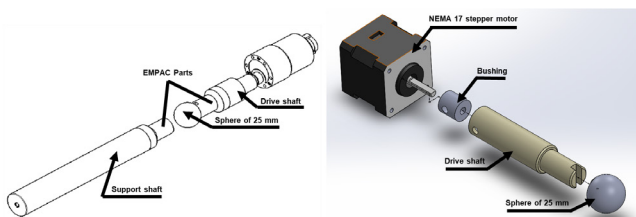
Motor system, drive shaft, and bushing: a) current b) redesigned
